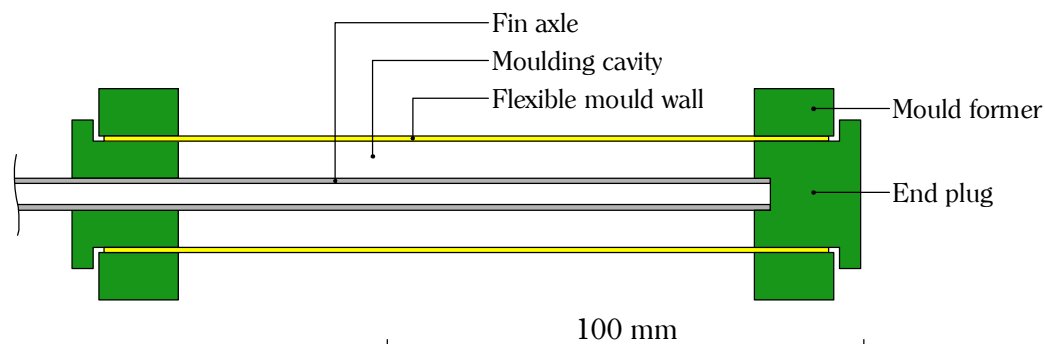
Cross-section through the fin mould at the axle, in the x-y plane.
